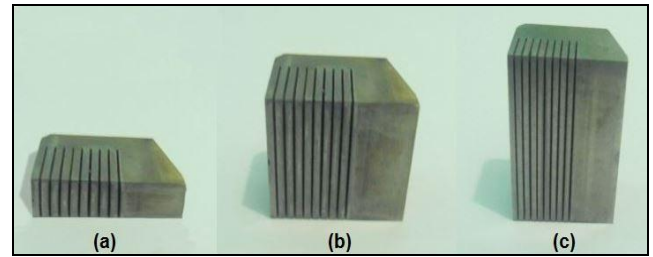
Photographic view of workpiece after machining (a) 5 mm thickness (b) 20 mm thickness (c) 35 mm thickness
